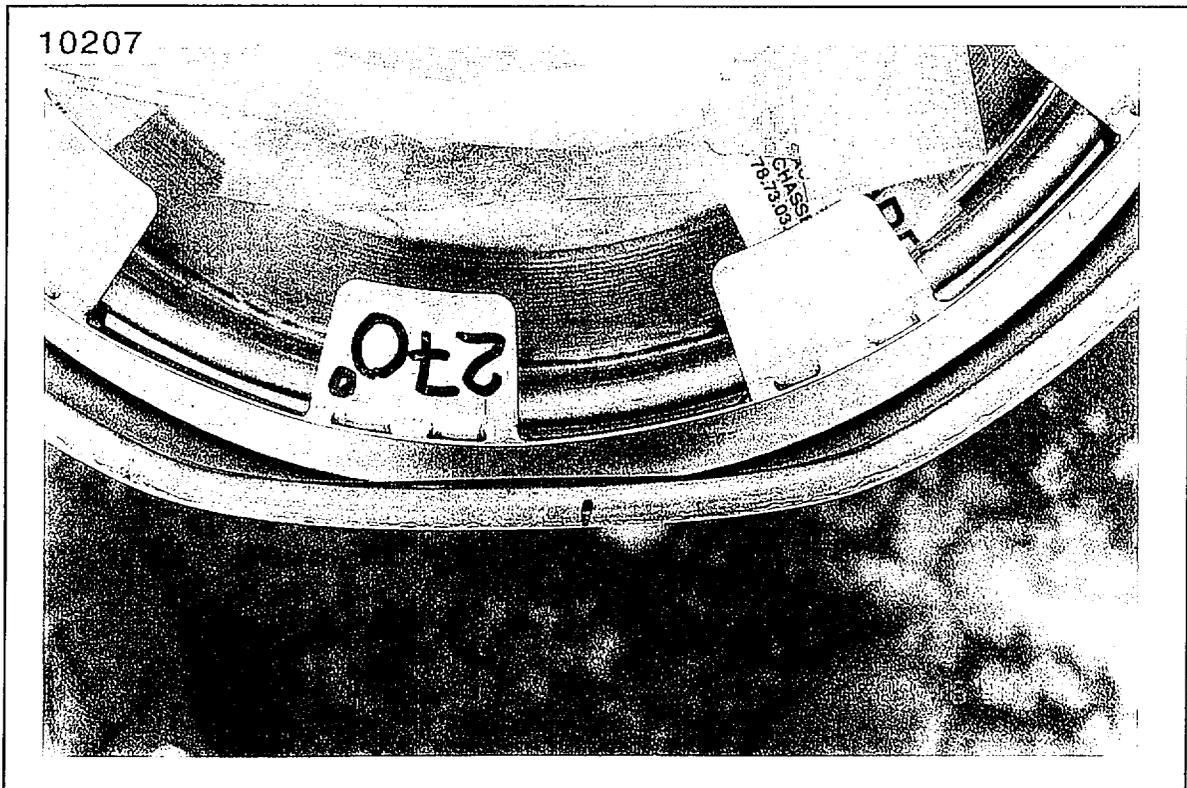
Lateral drop height 1,2m on specimen P3.
